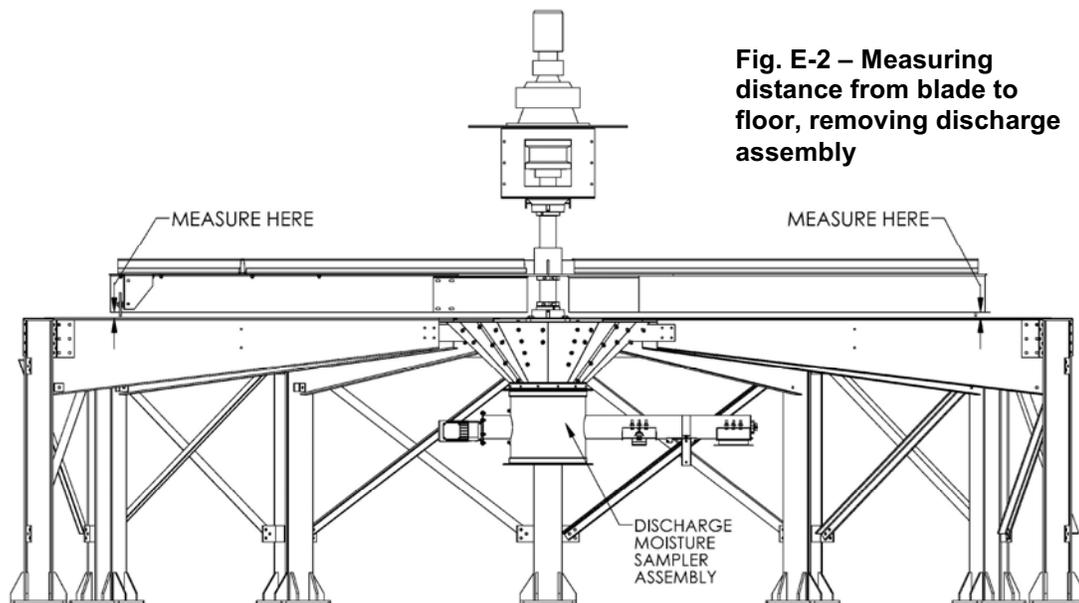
Measuring distance from blade to floor, removing discharge assembly
